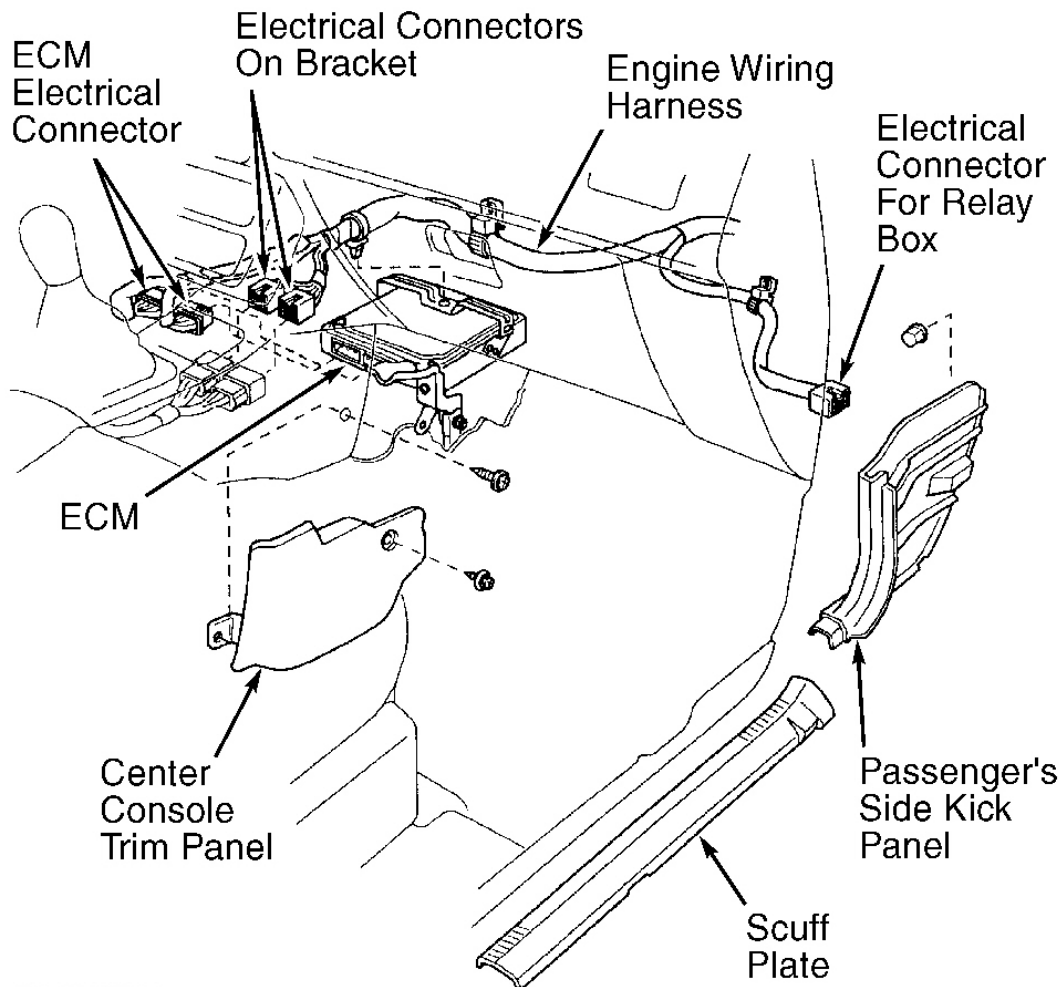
Identifying Relay Box, Electrical Connector & Engine Wiring Harness
